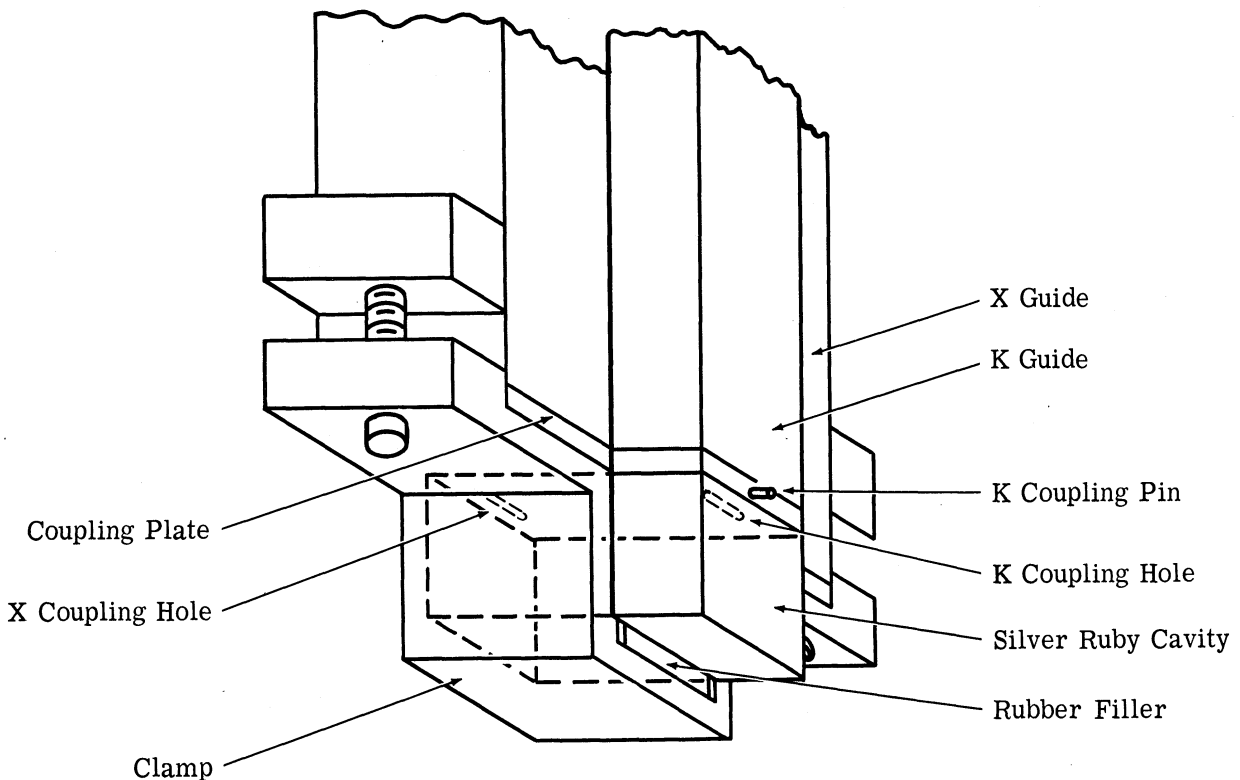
MASER CAVITY ASSEMBLY 5-186-B1
